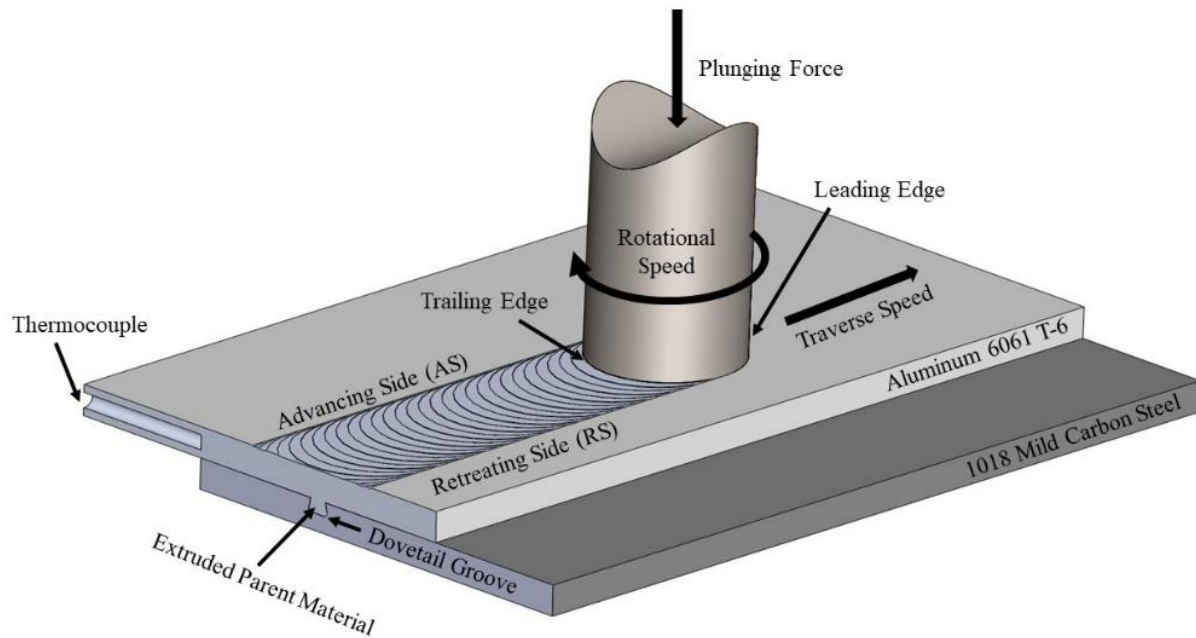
FSE diagram highlighting important FSW parameters and terminology as well as indicating the material used in this research, location of the thermocouple for weld temperature measurements, and dovetail extrusion.
